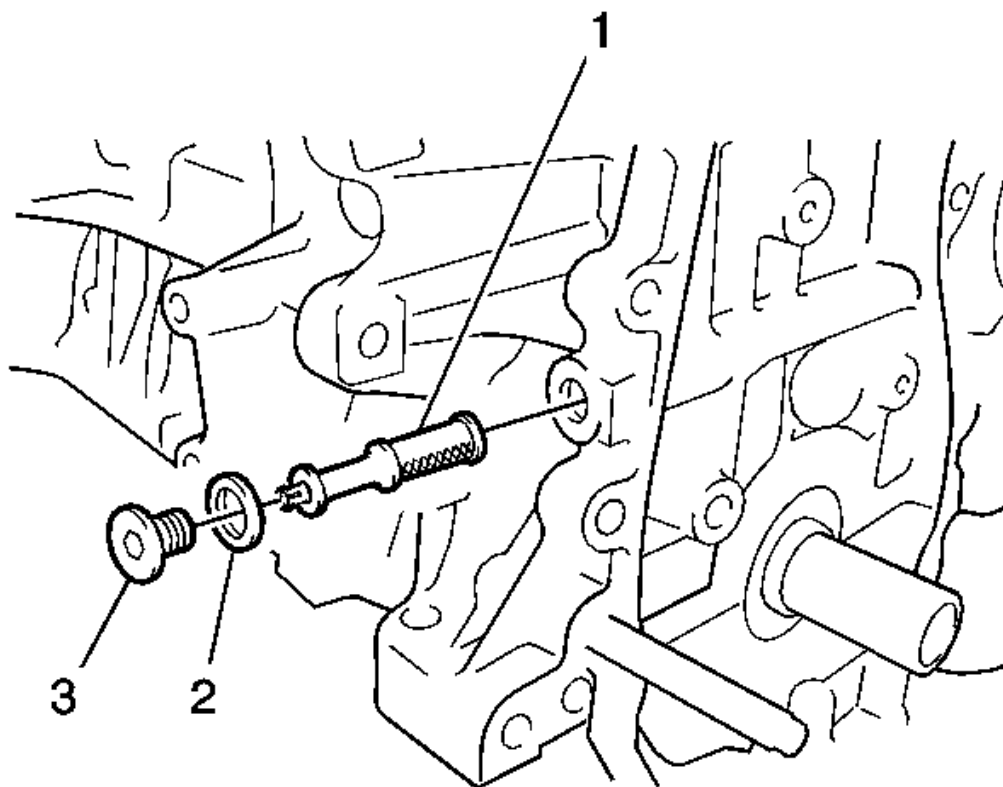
View Of Control Valve Filter, Gasket & Plug
